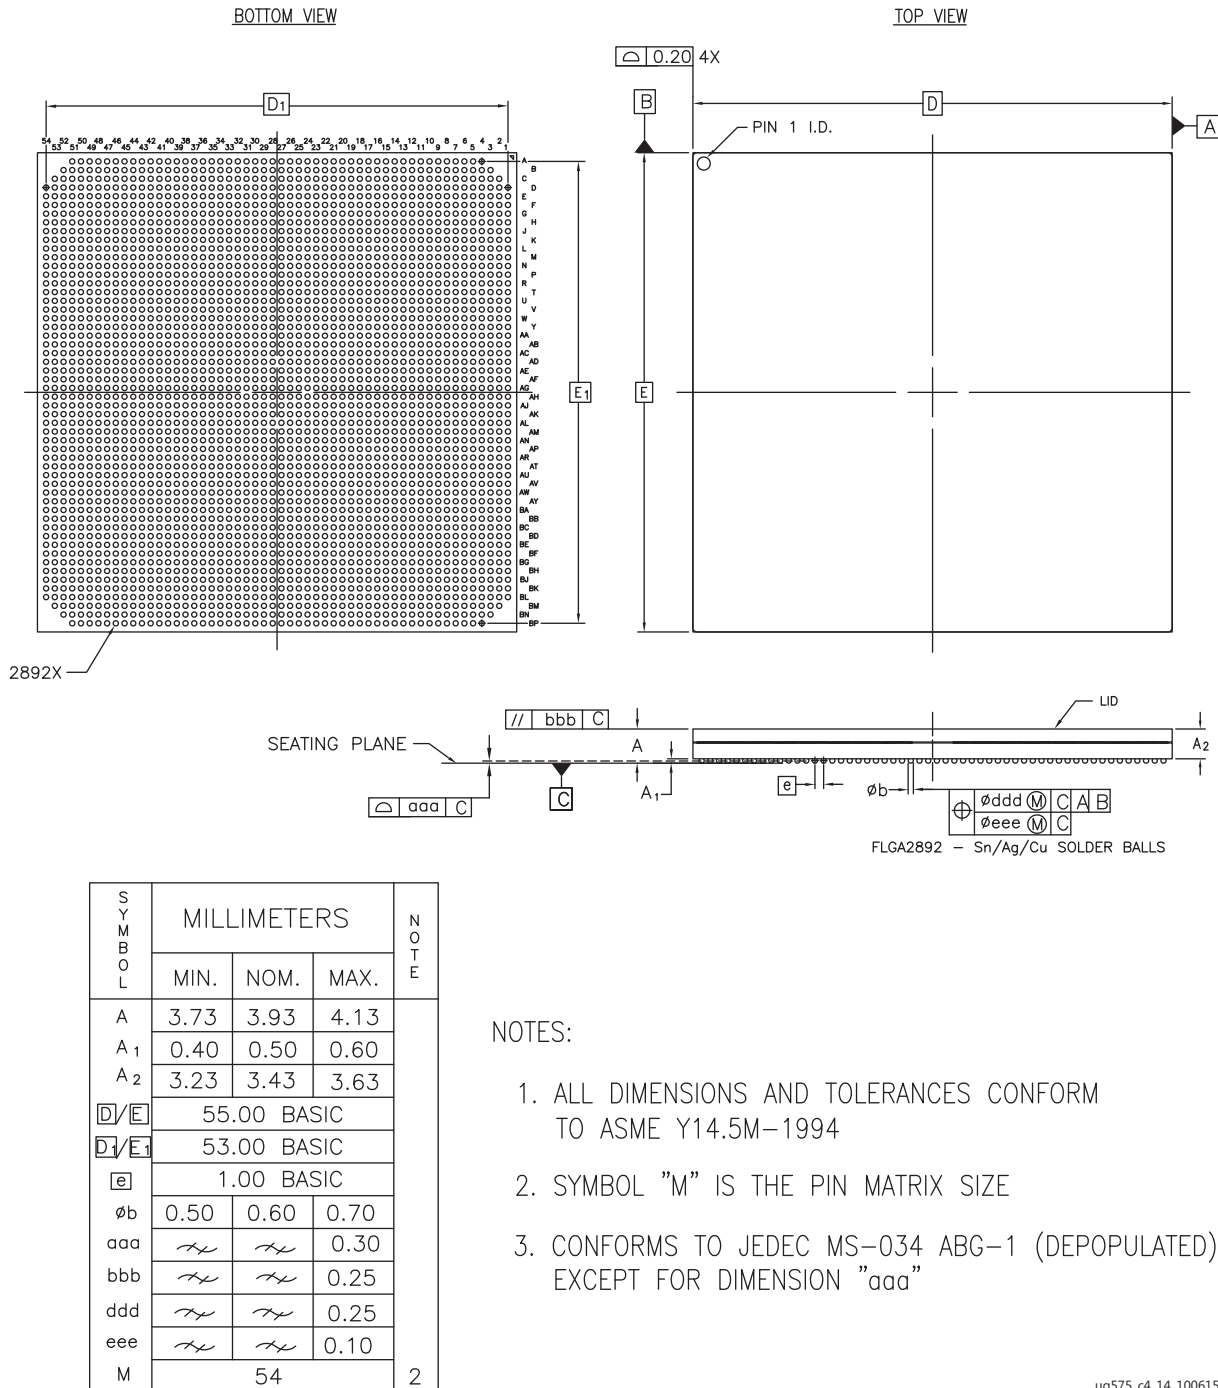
Package Dimensions for FLGA2892 (XCVU440)
